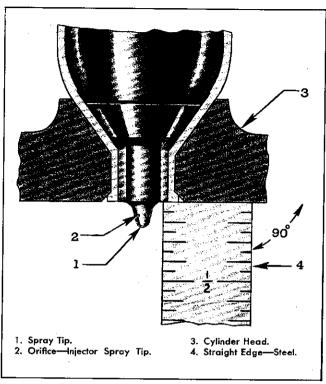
Checking Location of Injector Spray Tip Relative to Lower Surface of Cylinder Head.
